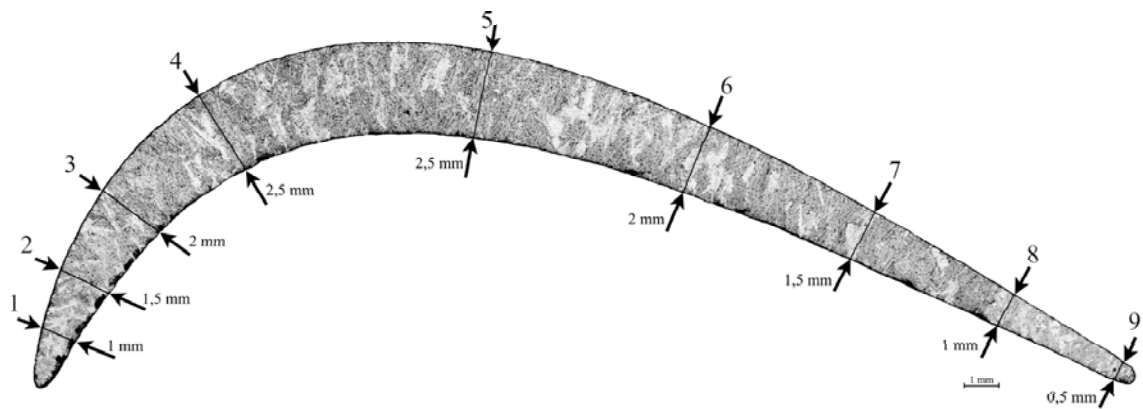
The macrostructure of turbine blade casting with dimensions of 30x50 mm from superalloy Inconel 713 C (cut C – Fig. 5). 1 – 9 – the areas of dendrites arm spacing measurement
